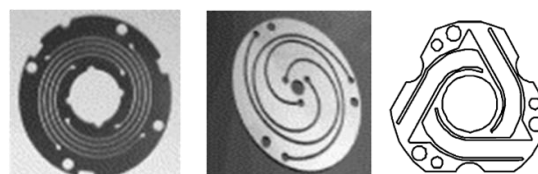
a) four arm concentric b) Three arm Eccentric c) Linear arm Flexure Bearings.
